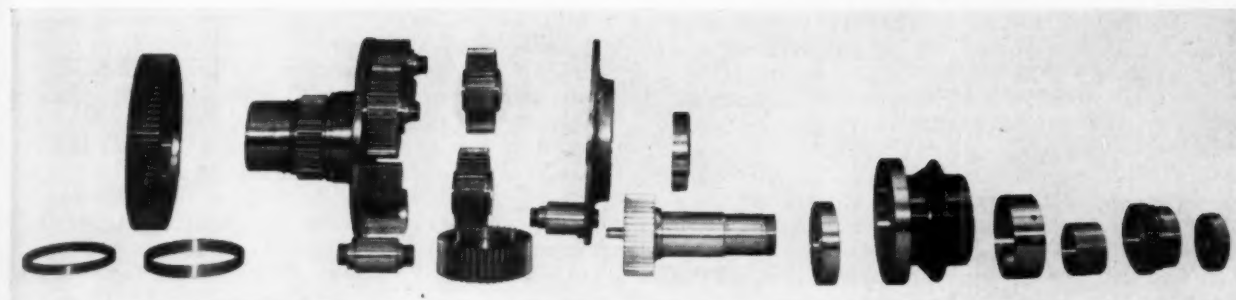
ROTATING PARTS OF MAIN REDUCTION GEAR
